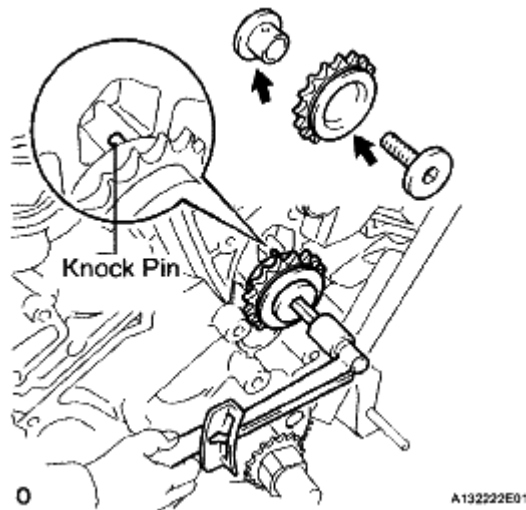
Tightening No. 2 Idle Gear Shaft Using Hexagon Wrench
